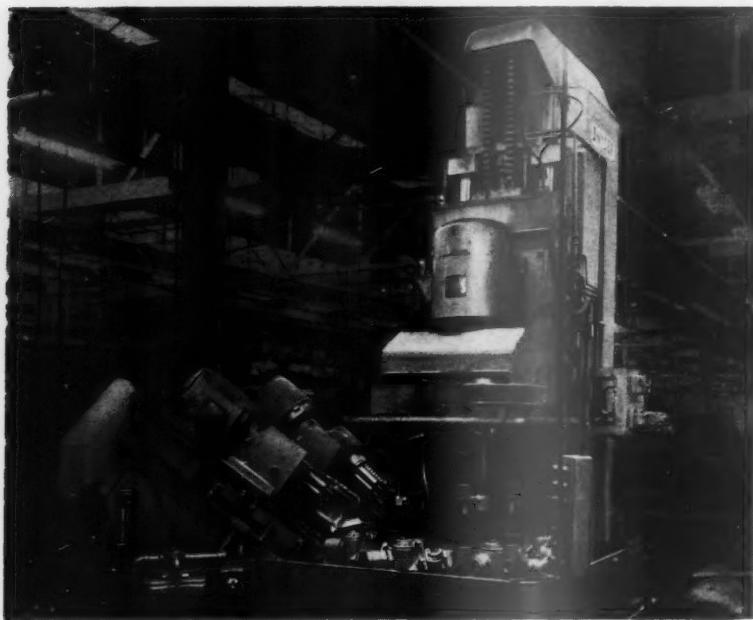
Special Snyder eight-station drilling and reaming machine for rear end covers
